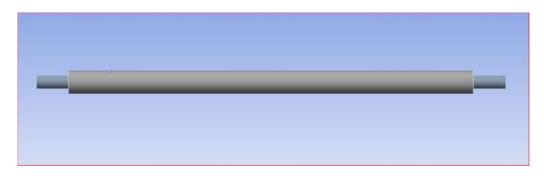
Design Modular Geometry of Double tube heat exchanger.
